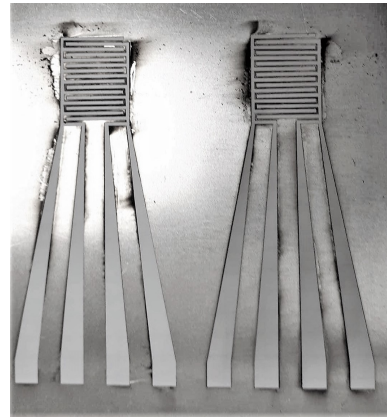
Mask obtained thanks to laser cutting into a Ni sheet
